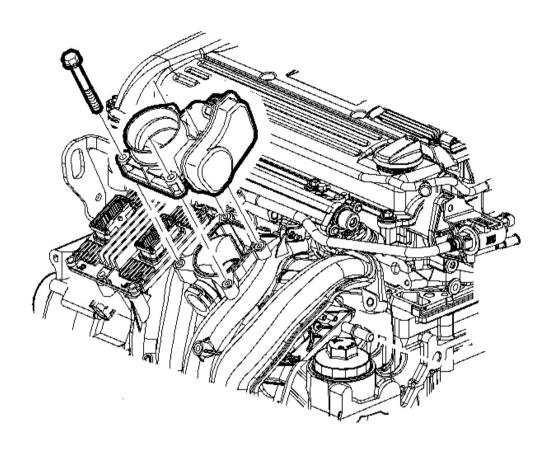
View Of Throttle Body Assembly & Bolts Courtesy of GENERAL MOTORS CORP.
